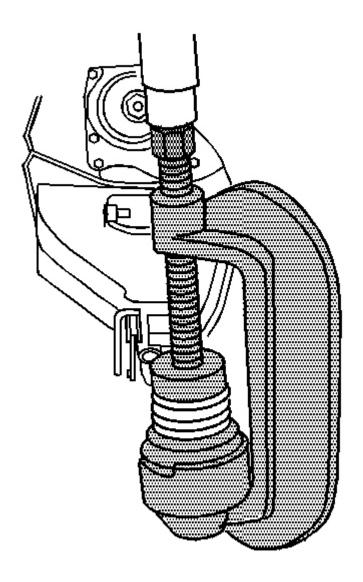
Flaring Lower Ball Joint Flange Courtesy of GENERAL MOTORS CORP.
